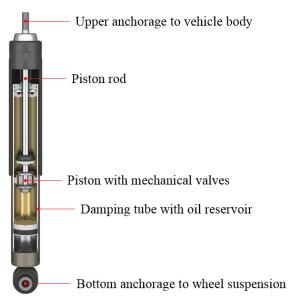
Simplified setup of damper unit with bottom & top anchorage points
